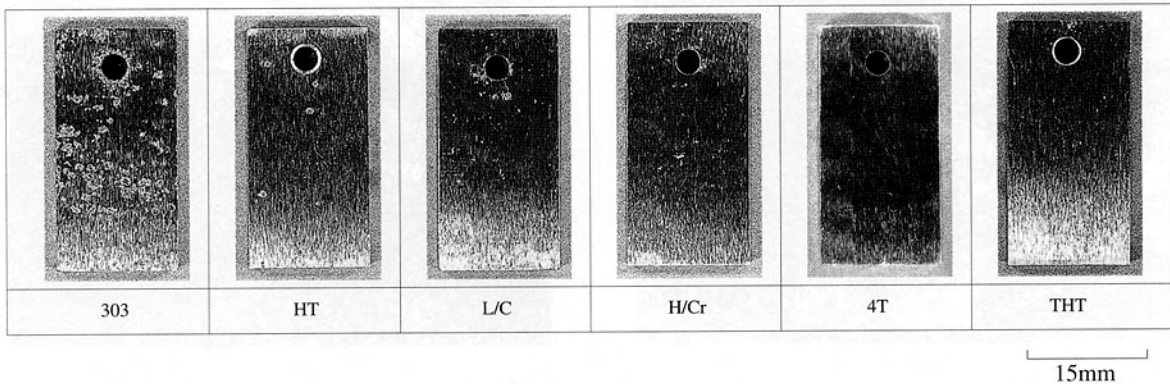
Surface condition of the samples corroded by cooling water of hot strip mill for 150h
